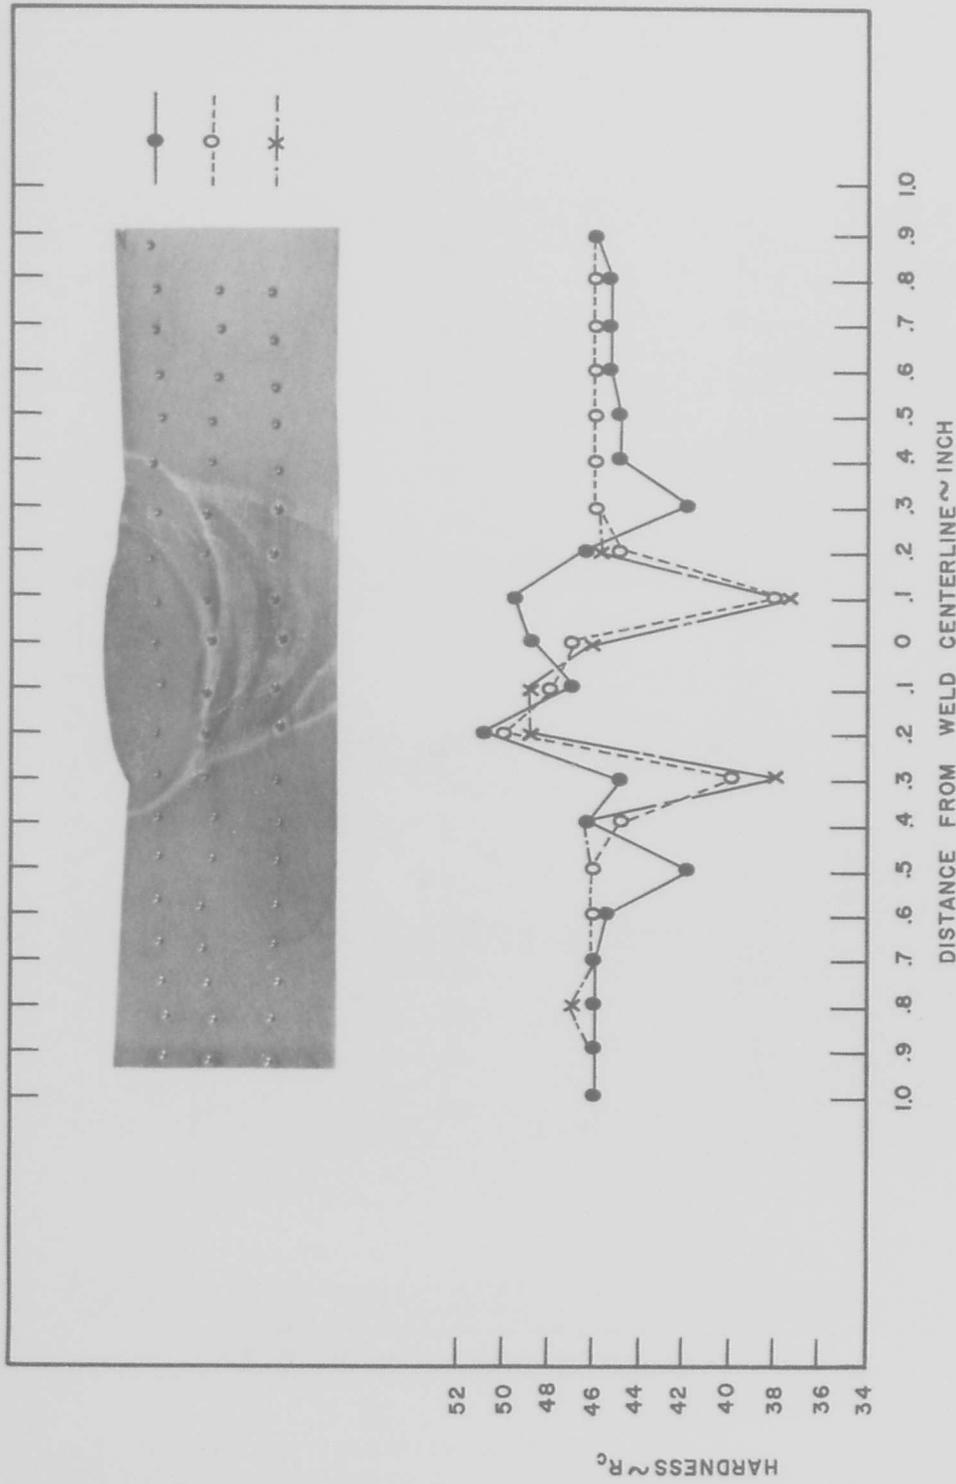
Hardness Survey of TIG Weld No. X253 Made in Vasco Jet X-2 1/2-Inch Plate at 10 ipm Using Filler Wire No. 9.
